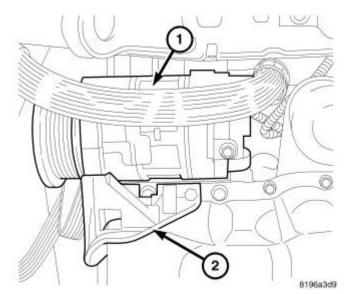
A/C Compressor & Mounting Bracket Courtesy of CHRYSLER GROUP, LLC
